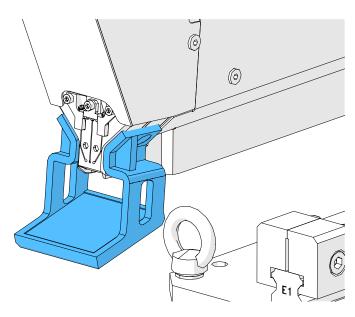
Use the mounted jaws checking mirror to check the crimping jaws
